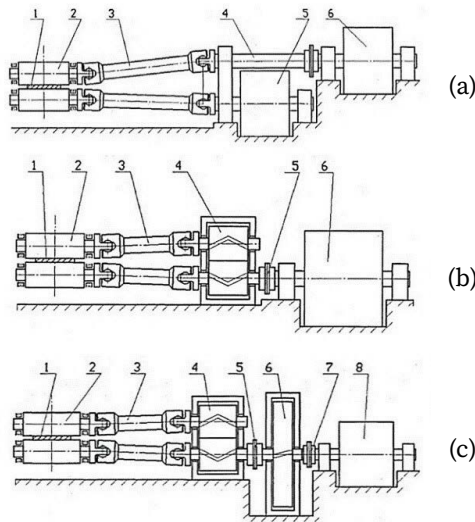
Different drives arrangement of rolling mills: (a) separated drivetrains; (b) drivetrain with a pinion stand; (c) geared drivetrain: 1 – rolled metal; 2 – work roll; 3 – spindles; 4 – intermediate shaft (a) or pinion stand (b, c); 5 – motor (a), motor coupling (b) or intermediate coupling (c); 6 – motors (a, b) or gearbox (c); 7 – motor coupling; 8 – motor
